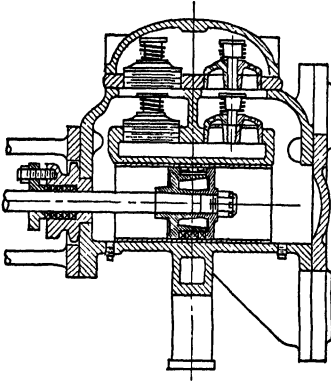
Pump end with a cap and valve plate, or turret valve assembly. (Courtesy of Worthington)
